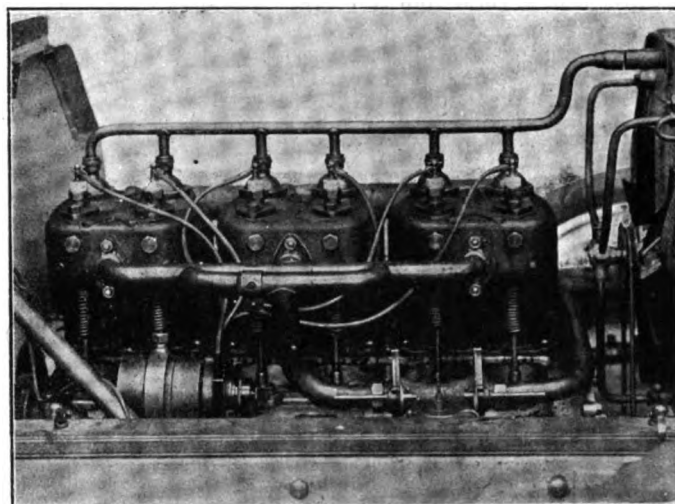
General View of Inlet Valve side of Brooke Six-cylinder Engine.
